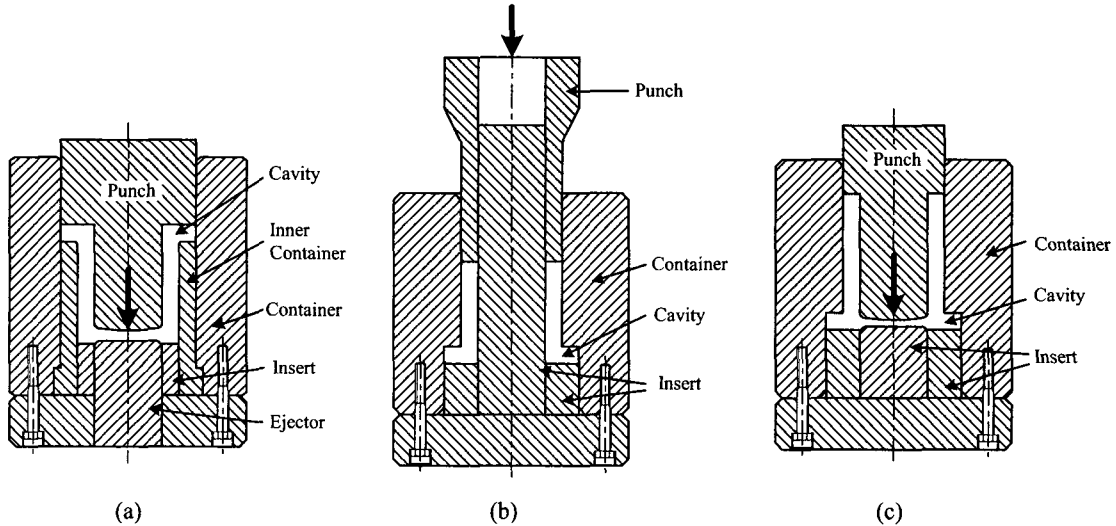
Experimental equipments for closed-die forging of a hollow-T shaped part, (a) method-1 and method-2, (b) method-3, and (c) method-4
